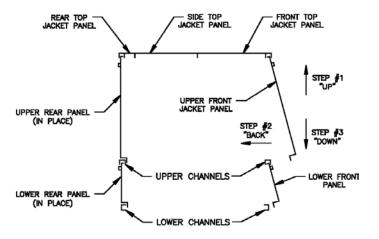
REMOVAL OF JACKET FRONT PANEL
